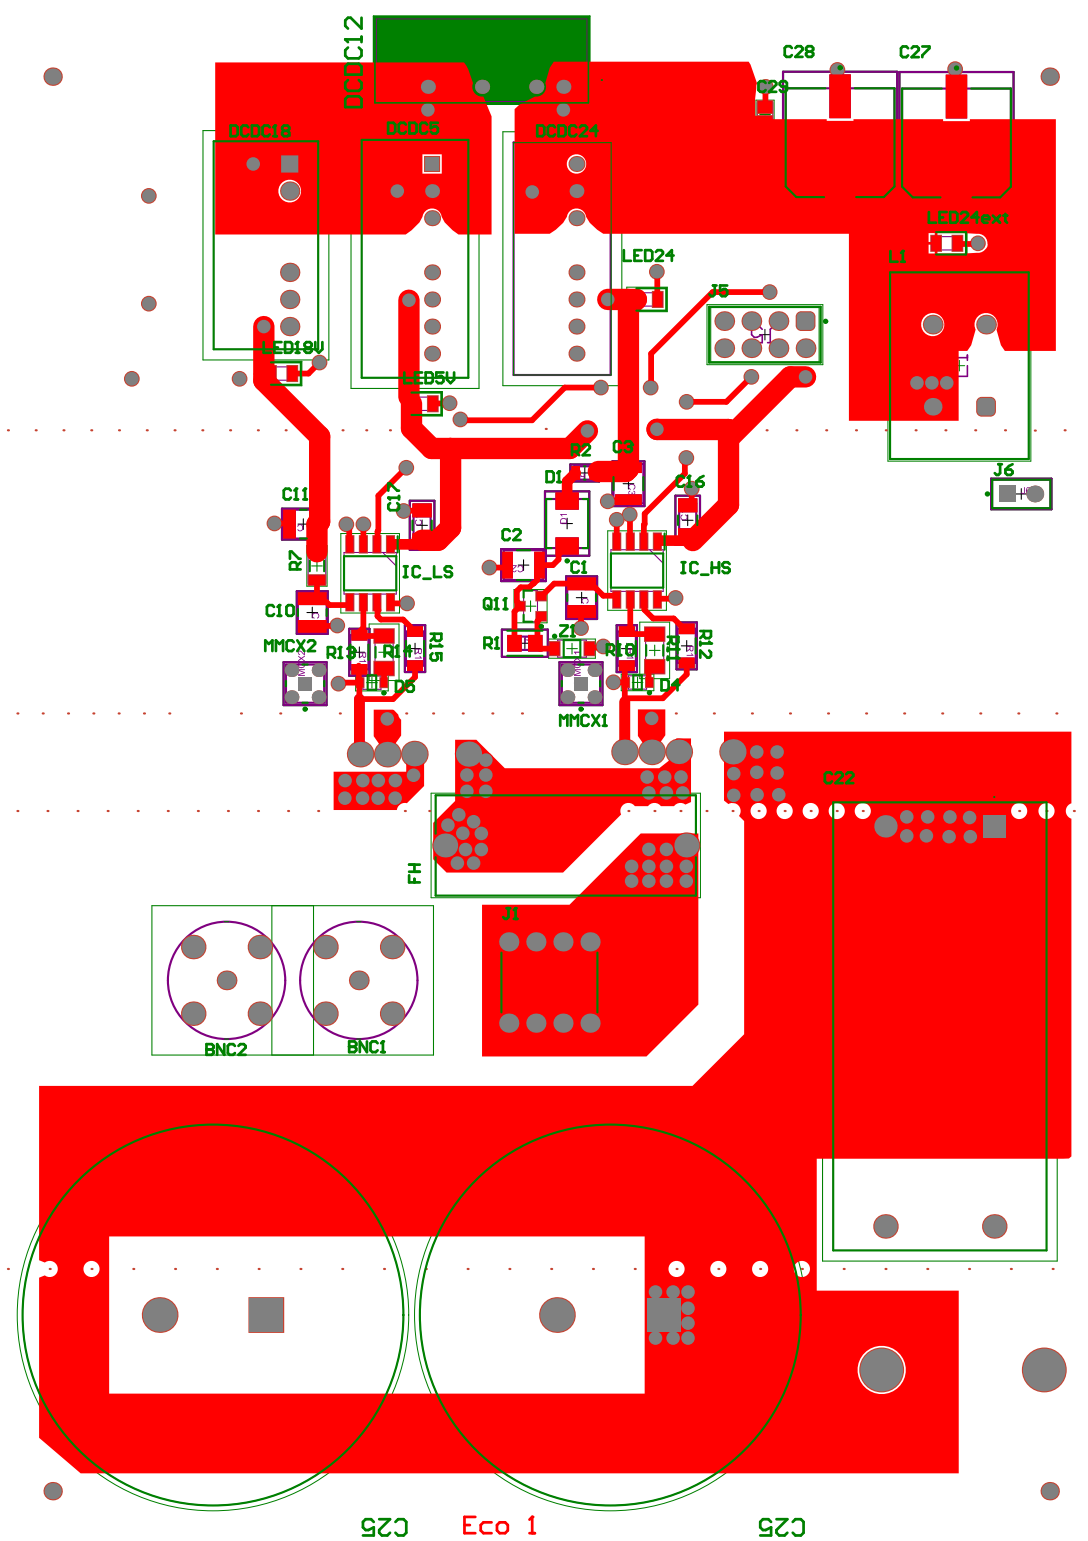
PCB "Eco1" with a 25% hole-based perforation strategy, top side.
